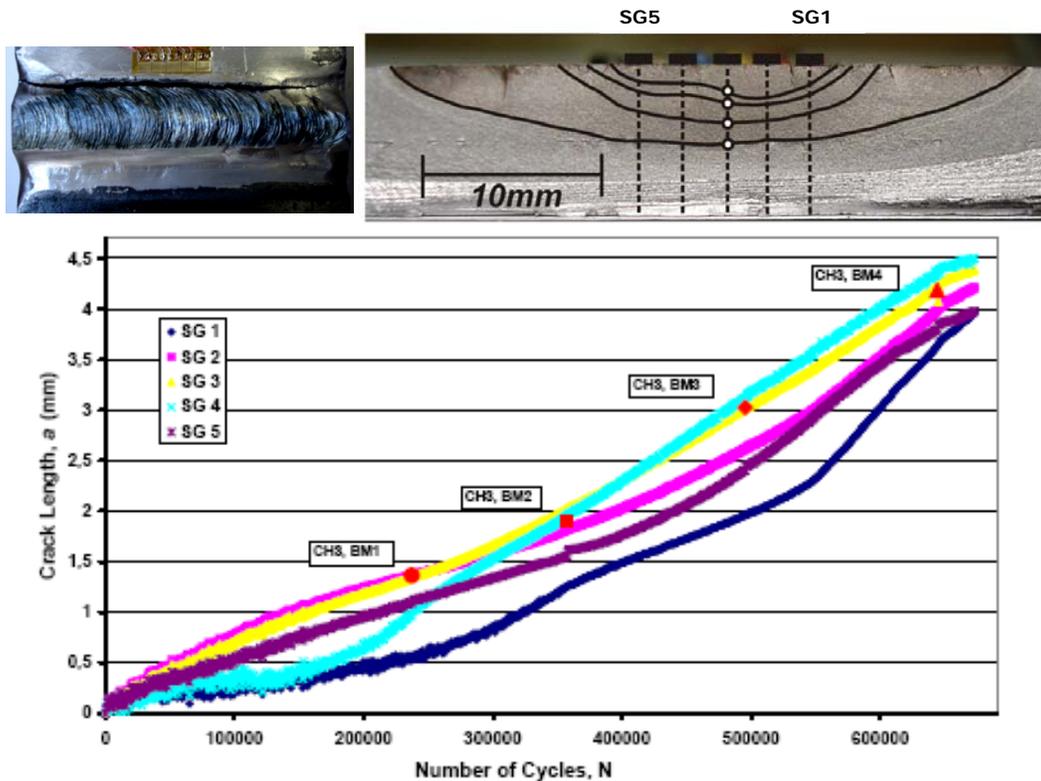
Fatigue crack length for each strain gauge position. In the upper-left position a photograph shows the analyzed fatigued welded specimen and details of the attached strain gauges. On the right, a photograph shows the fracture surface and indications of five ink-marked fatigue crack positions.
